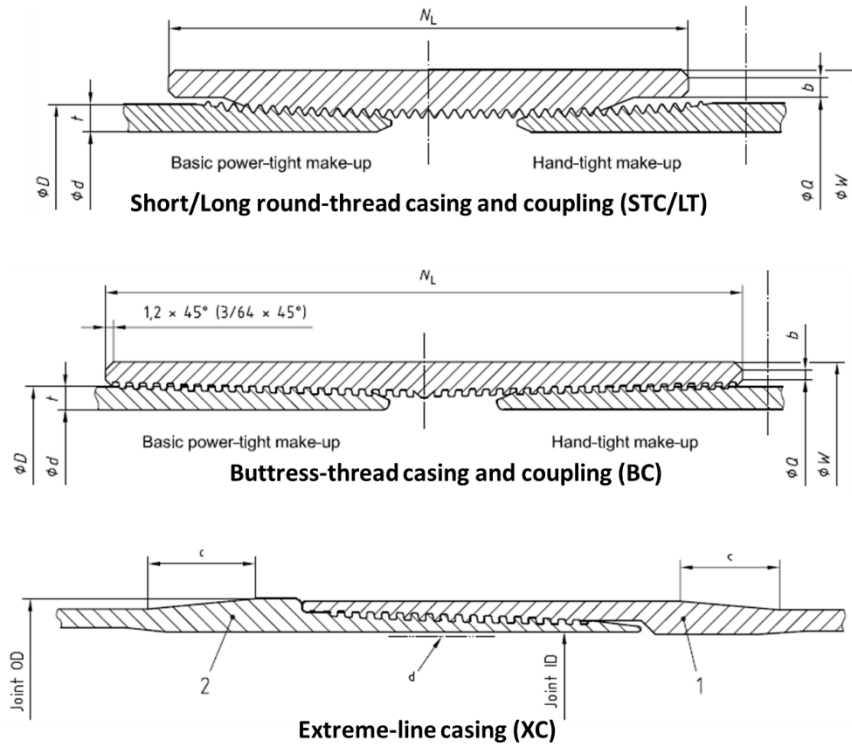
Drawings for Short/Long round-thread casing and coupling (top), Buttress-thread casing and coupling (BC), and Extreme-line casing (XC) [5].
